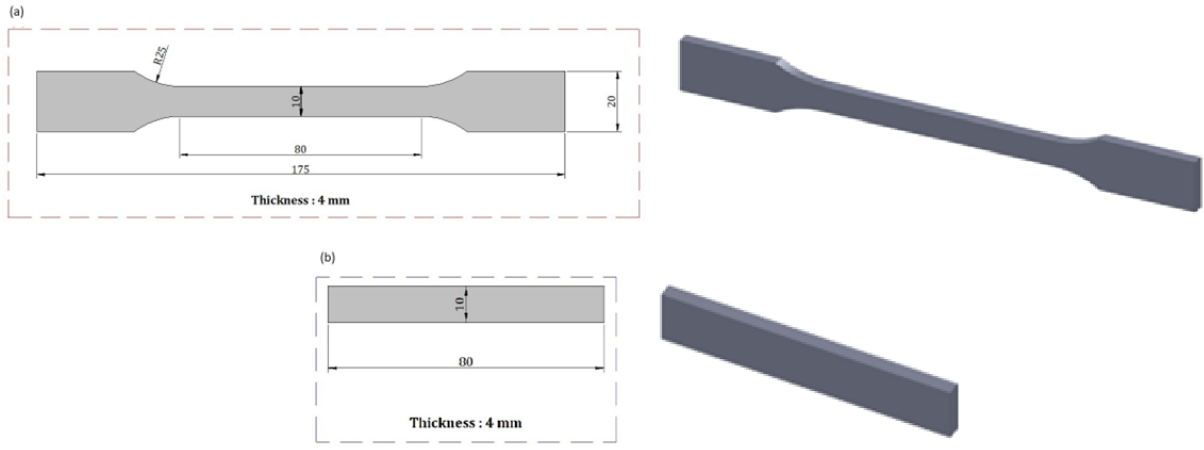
Dimensions for (a) tensile and (b) three-point flexural specimens (units are in mm) ((a) çekme ve (b) üç noktalı eğme numunelerinin boyutları (birimler mm cinsindendir))
